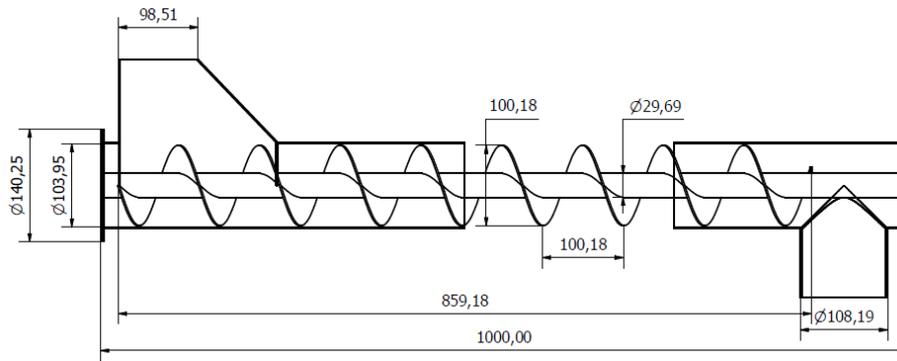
Geometric dimensions of the T_{Hel} – Reference (dimensions in mm).
